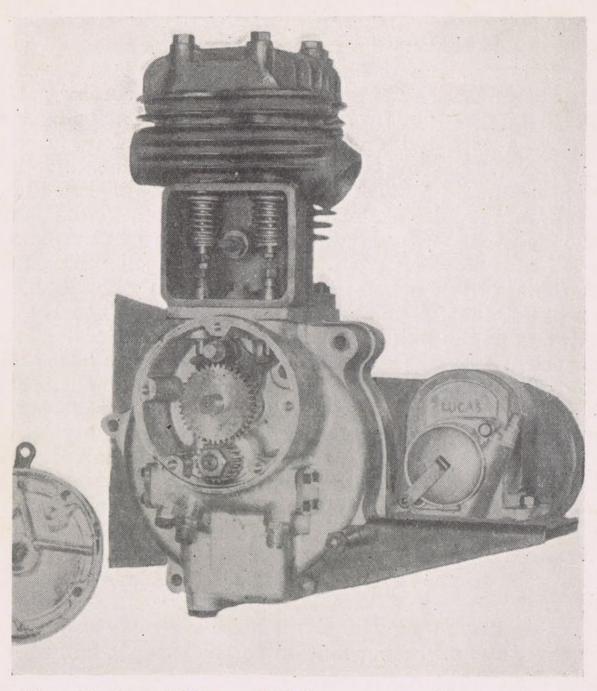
The 2.46 h.p. S.V. Engine with Timing Cover and Valve Cover Plate Removed
